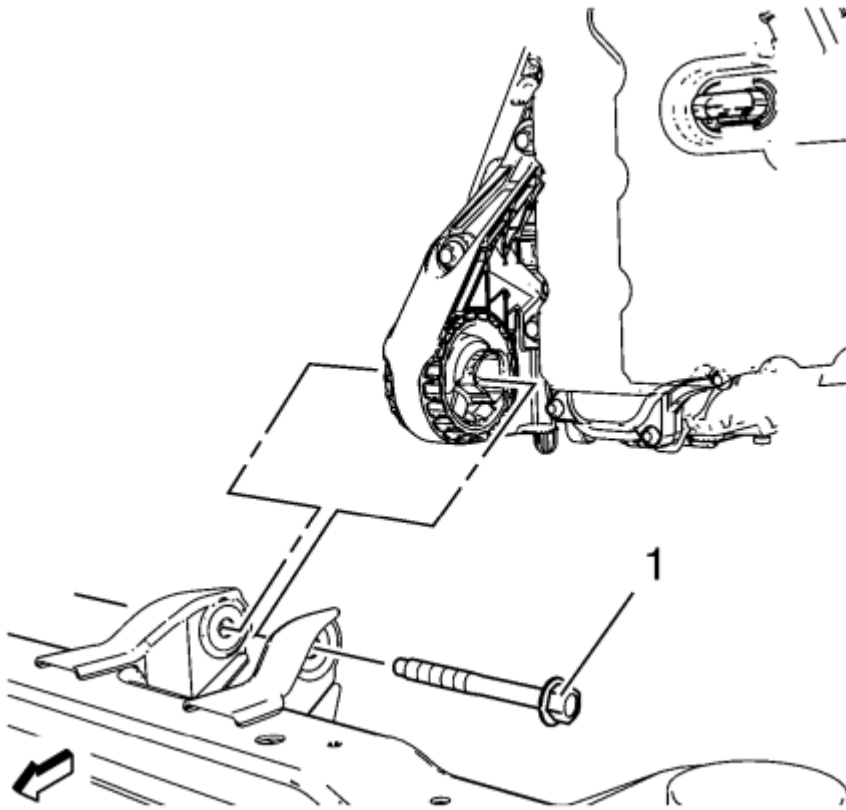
Automatic Transmission Mount Bracket Through Bolt
